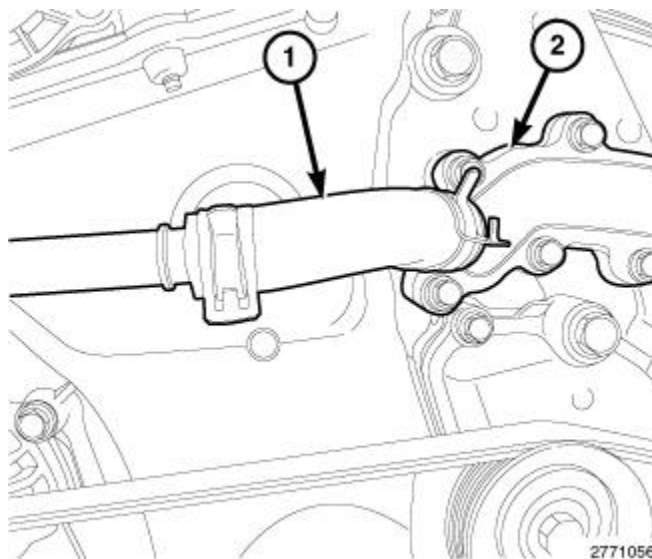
Heater Core Supply Hose & Coolant Outlet Housing
